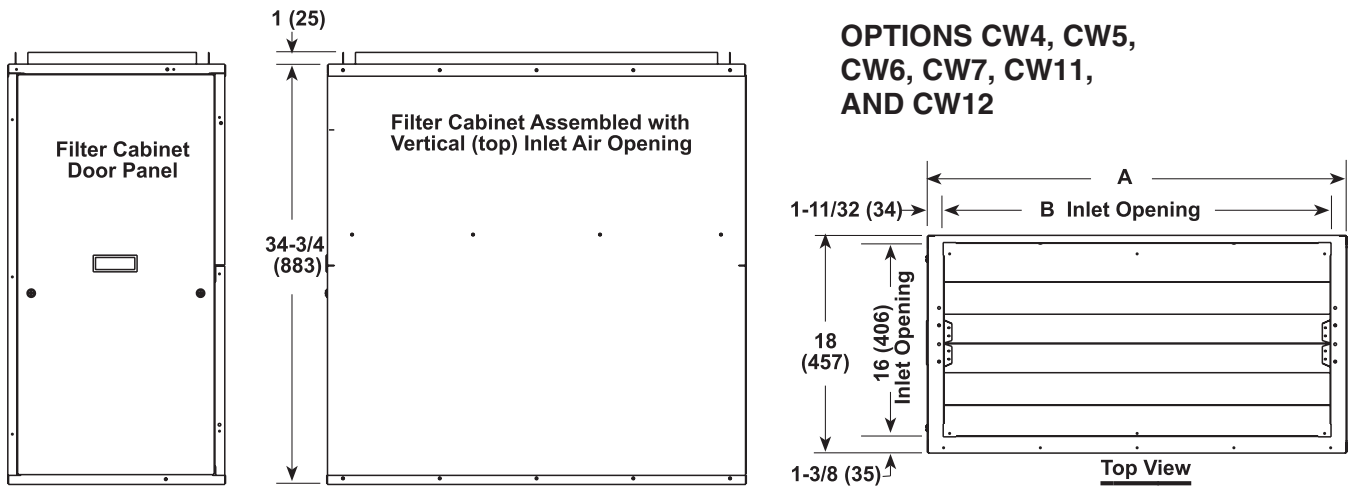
Top Inlet Cabinet Dimensions (Refer to Table 4)
